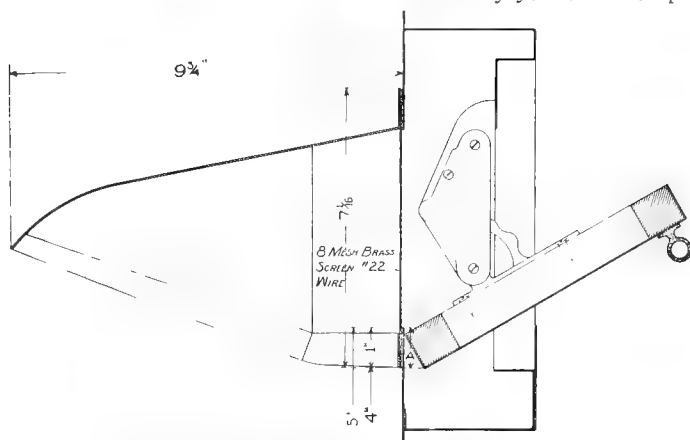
Standard Ventilating Hood, Cross Section, Steel Car.
